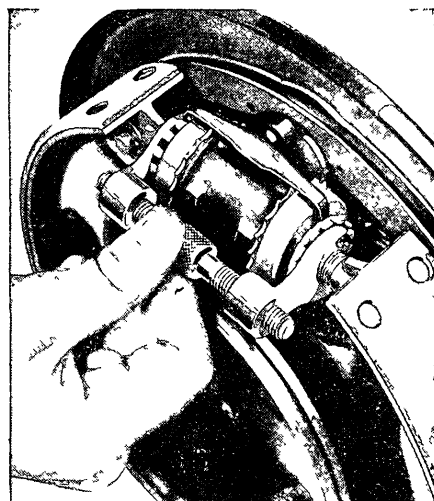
Type clamp to hold pistons in cylinders of Huck-Chevrolet brakes
